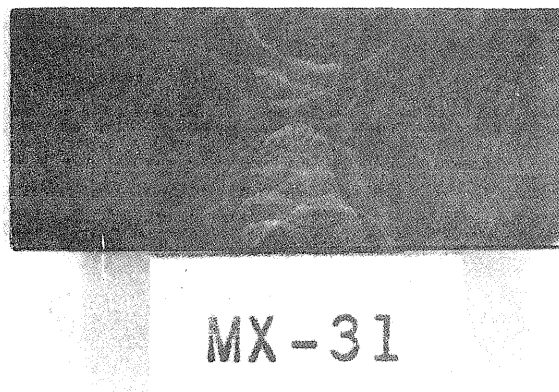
SIDE BEND TEST SPECIMENS OF WELDMENTS IN
